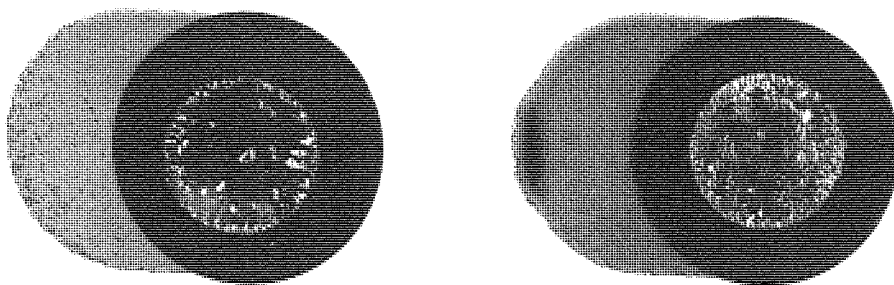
Photograph showing castings from a HMDS/TMCS 'gassed' mould(right)
